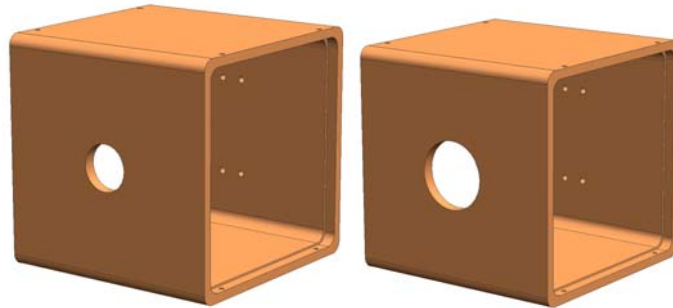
a) Current Design 1" Hole b) Suggested Design 1½" Hole
